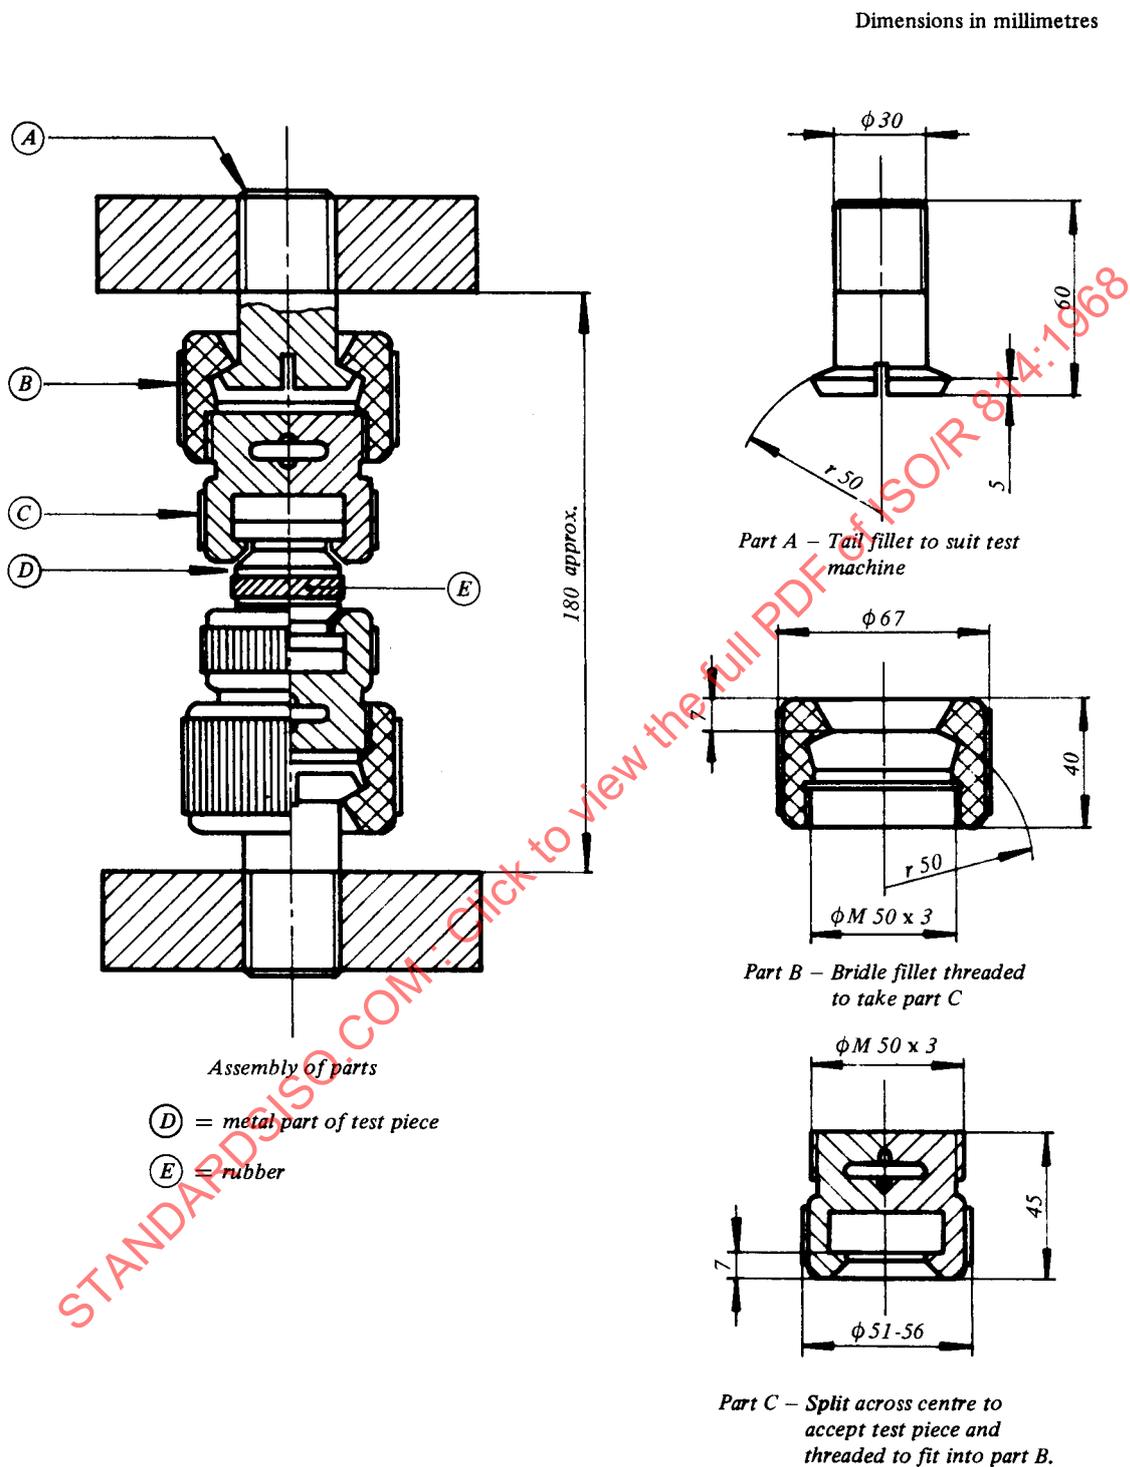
Test fixtures for holding rubber-to-metal bond test pieces
